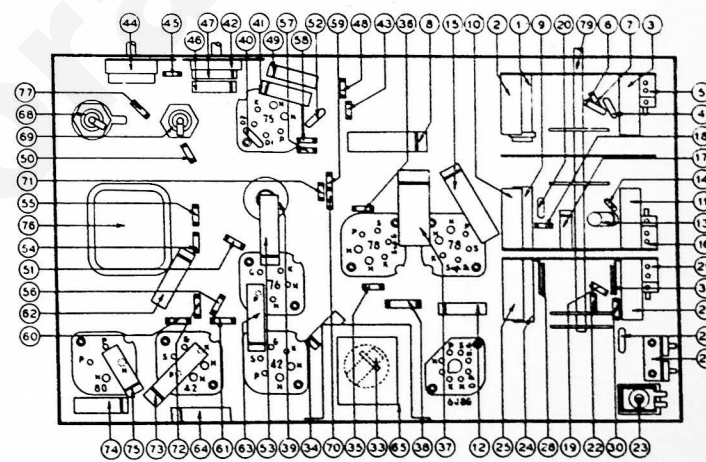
MODEL 40-755 PART LOCATIONS, UNDERSIDE OF CHASSIS
